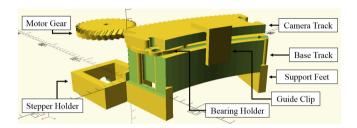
Mechanical hardware of our 3D scanner in OpenSCAD. The mechanical hardware consists of a double helical motor gear, geared revolving camera track, guide clip, bearing holder, static lower track, stepper holder, and support feet.
